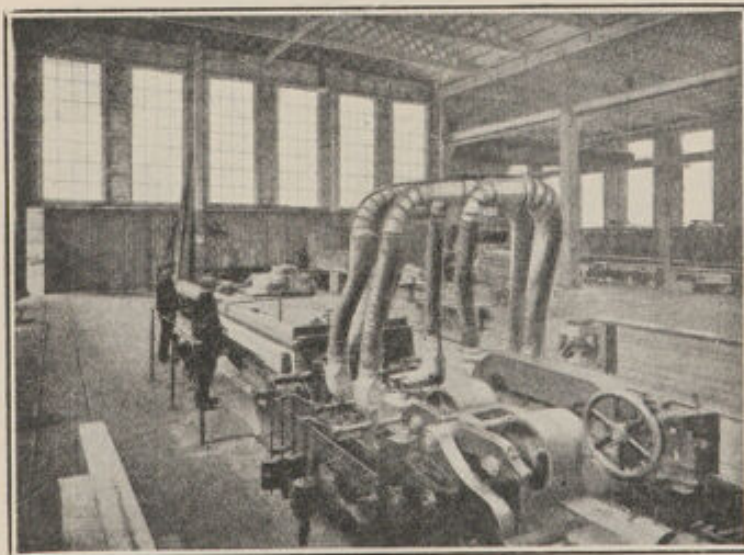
Six-cutter Wood-planer equipped with apparatus for removing wood refuse. (Messrs. Sturtevant Engineering Co., Ltd., London.)
